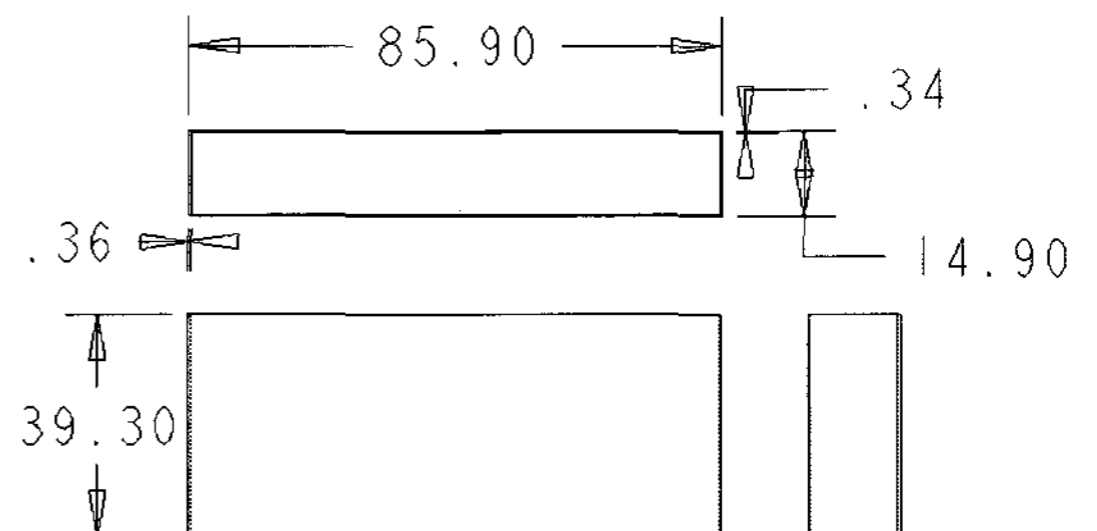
Final dimension of Ni-MH rectangular cup (unit : mm)
